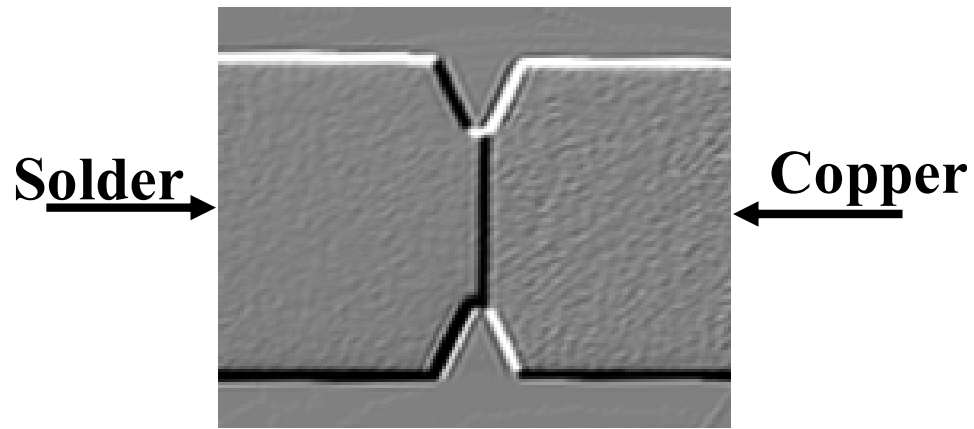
X-ray image of Bimaterial Copper Solder specimen for Sn3Ag0.5Cu
